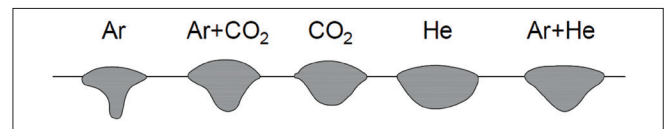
Shape of cross-section of weld depending upon shielding gas [25]
